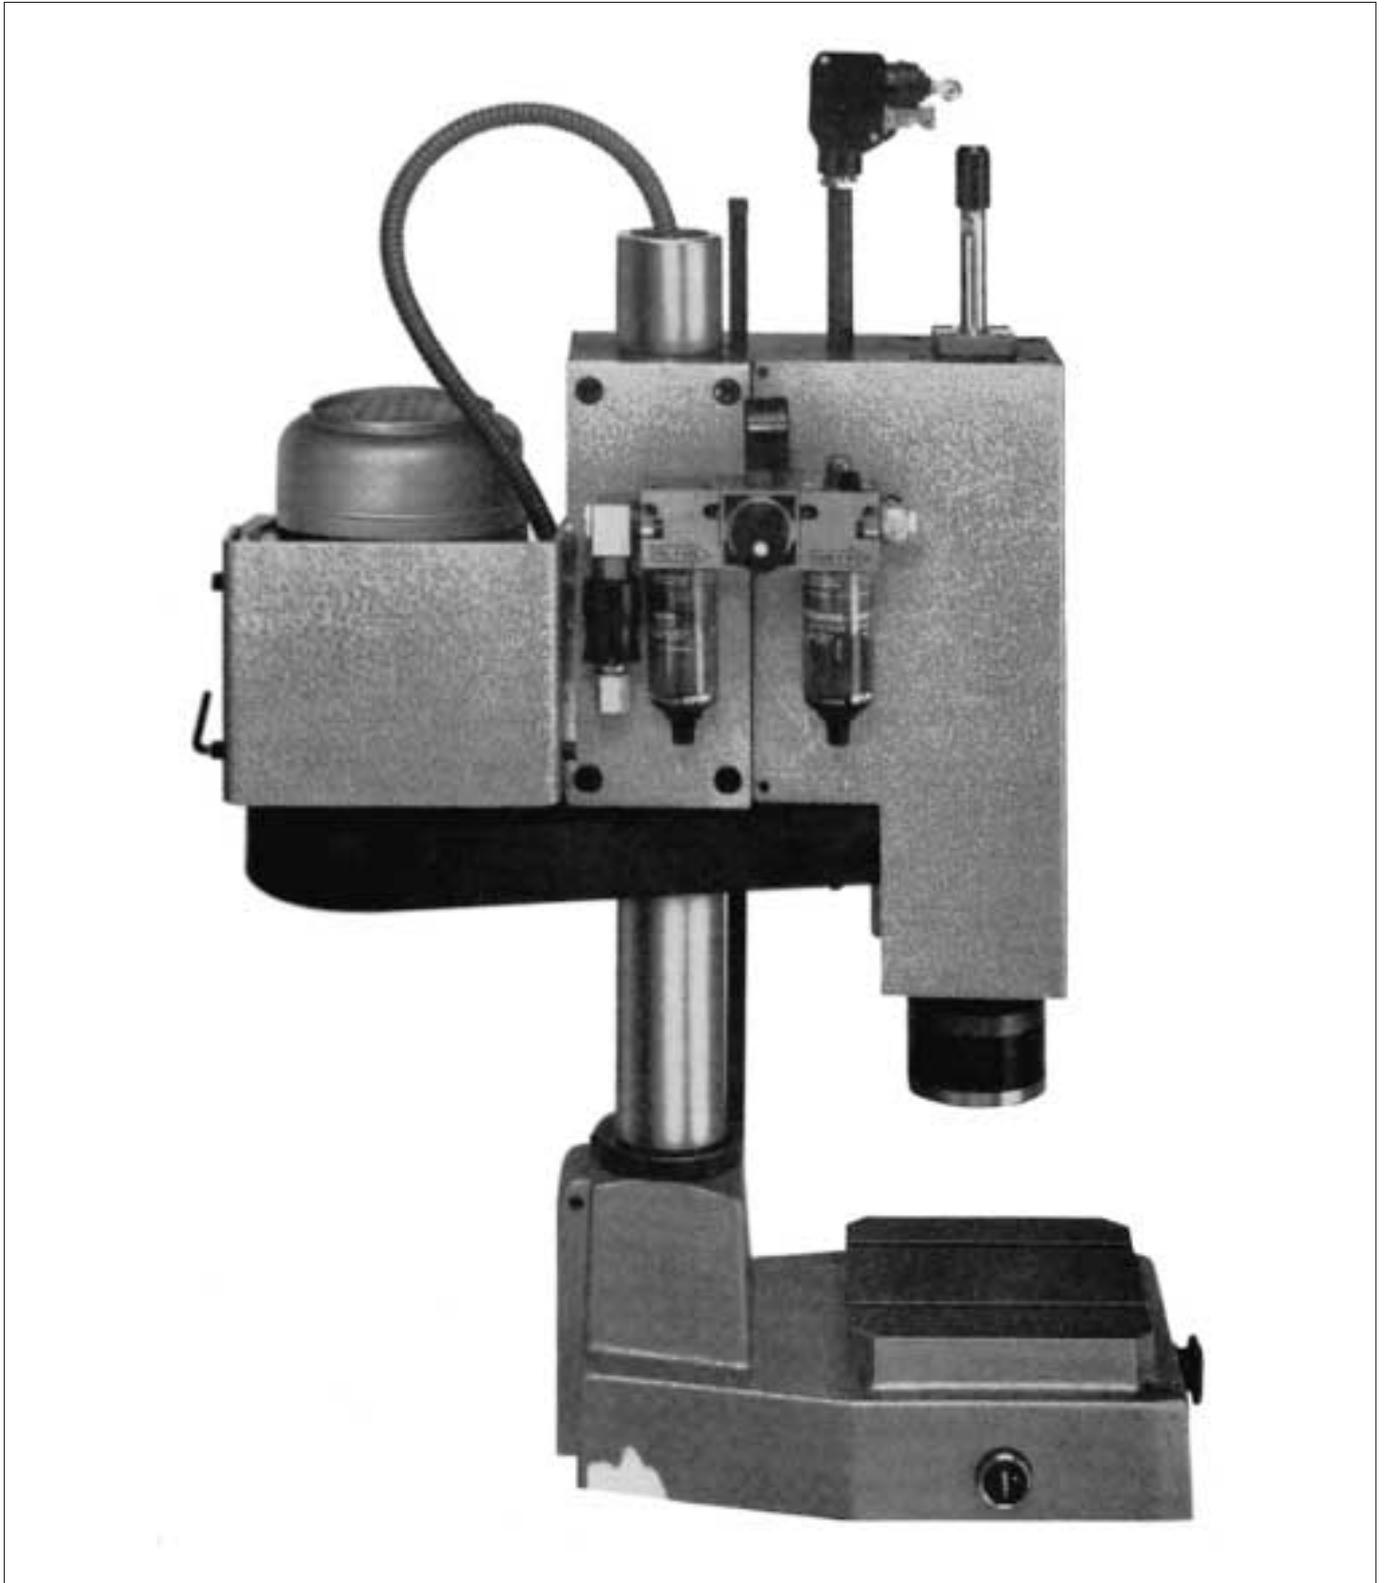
Commercial bench-type spinwelding machine. The basic model is equipped with a 3-phase squirrel cage motor. The rotating head with the jigs is fixed directly onto the double guided piston rod as shown in Figs. 10.12 and 10.13. The machine can also be supplied with adjustable speed, turntable, automatic cycle control and feeding device.
